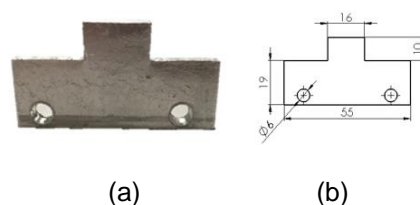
a) Aluminum specimen; b) Specimen dimensions.
